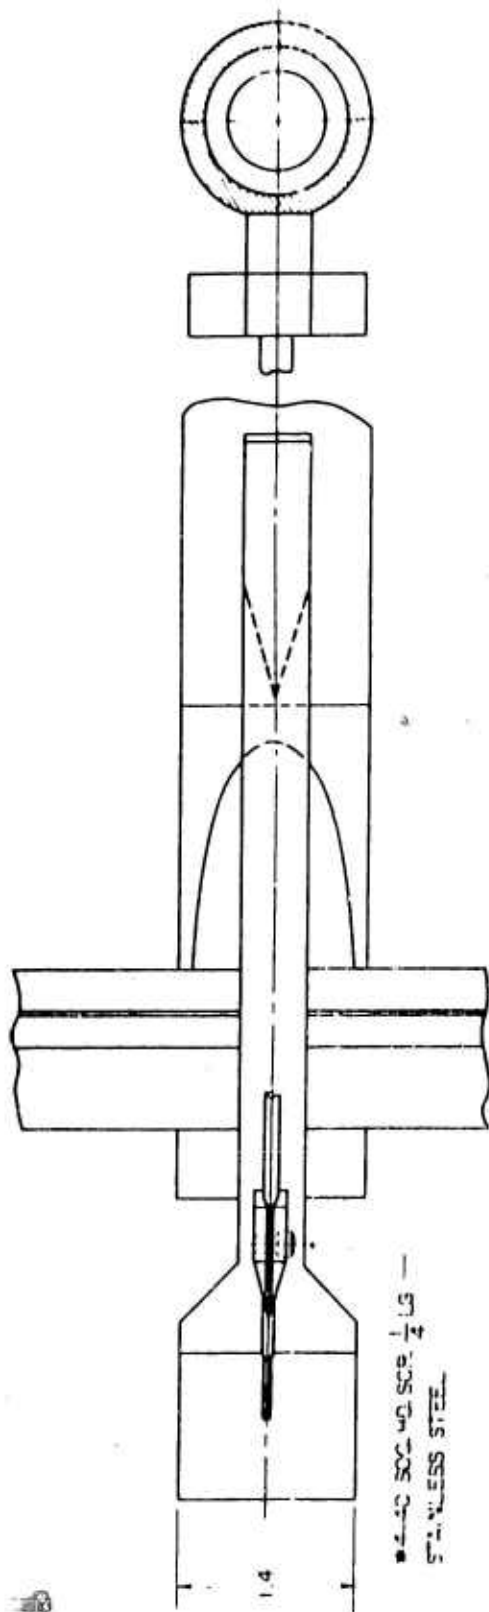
Wedge pitot probe assembly mounted on the calibration rake.
